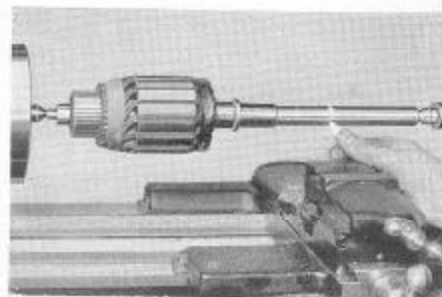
Testing and Straightening a Bent Armature Shaft in the Lathe
